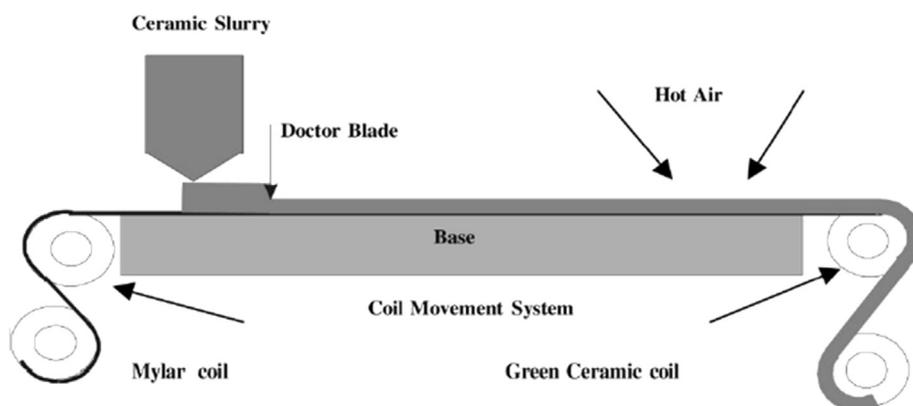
Tape-casting method of ceramic fabrication process [3].
